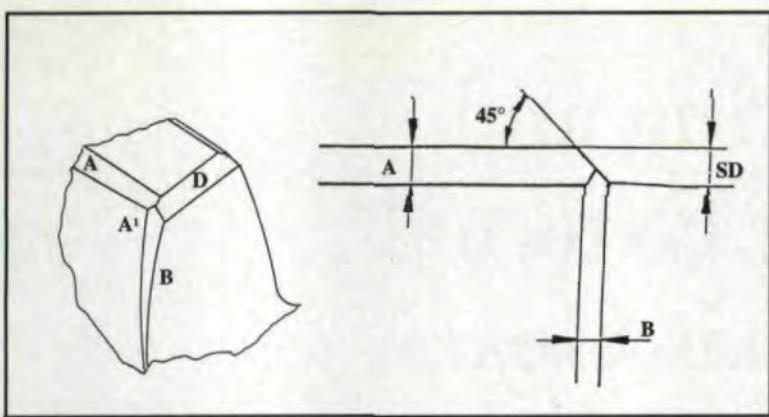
Gear tooth with edge chamfer and both tip chamfers.
